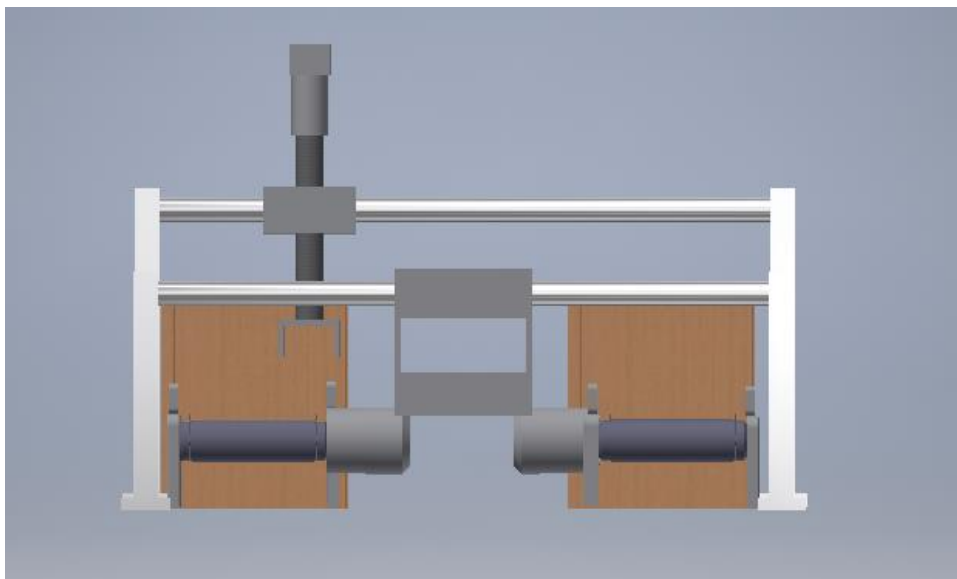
Prototype design of the machine in AutoCad Inventor. Front view
